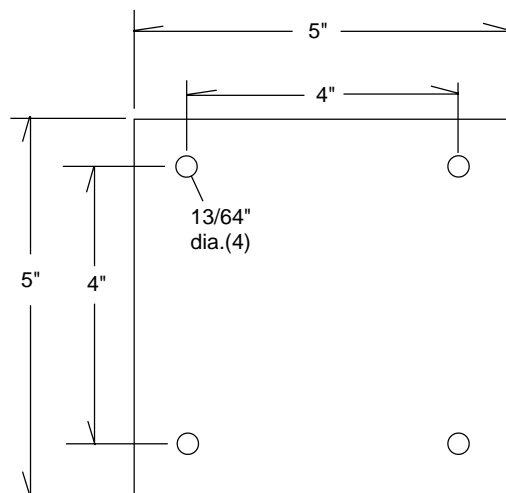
Mounting Dimensions - Argon-Hydrogen Manifold
